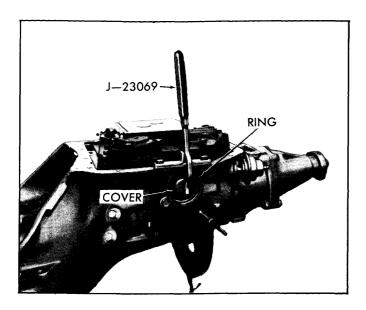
Removing 1-2 Accumulator Piston Cover Retaining Rings
